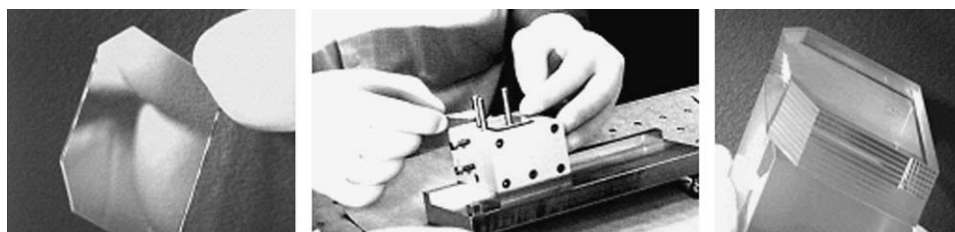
Slice stack assembly. Individual slice (left), assembling tool (centre) and assembled stack (right).
